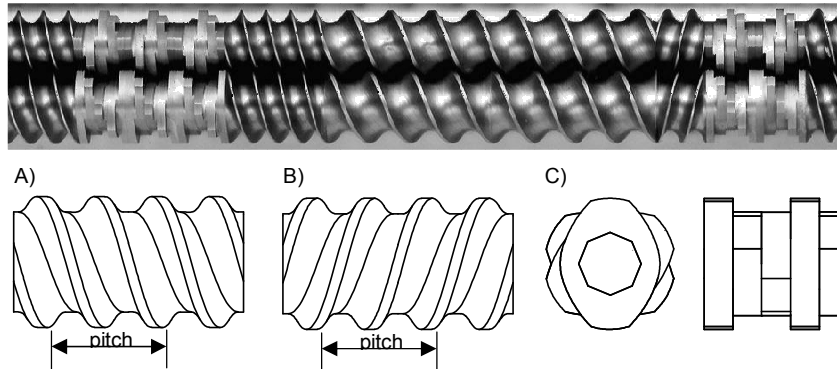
Co-rotating twin screw extruder. Top: close-up of a typical screw profile (www.coperion.com). Bottom: Types of screw elements included: a) conveying (or right handed) element; b) left handed element; c) kneading block.
